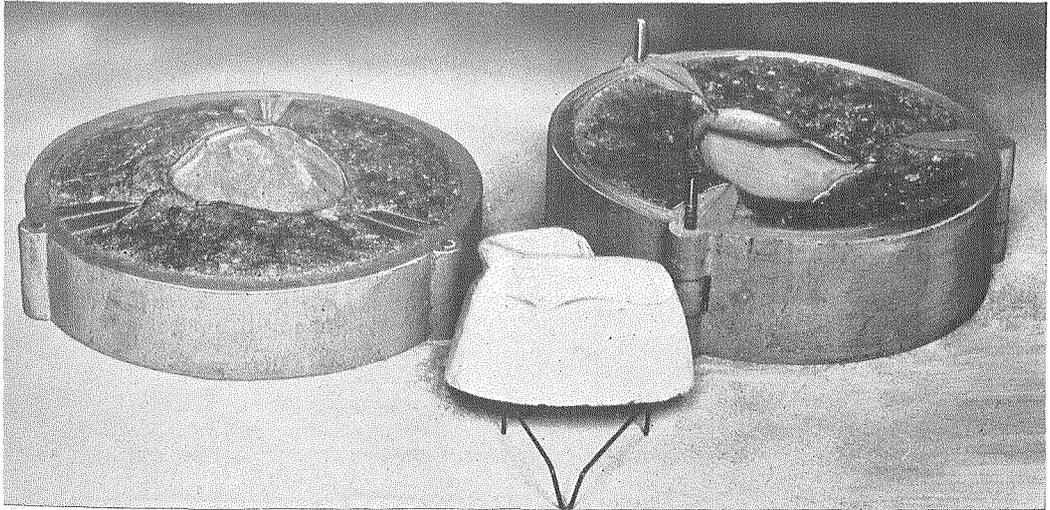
Model Removed, Sectional Part of Flask Closed
